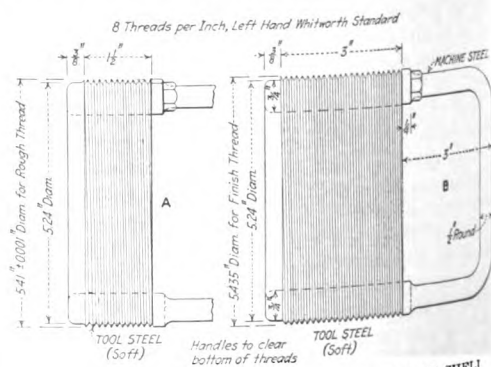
B. THREAD GAGE FOR BACK END OF SHELL
